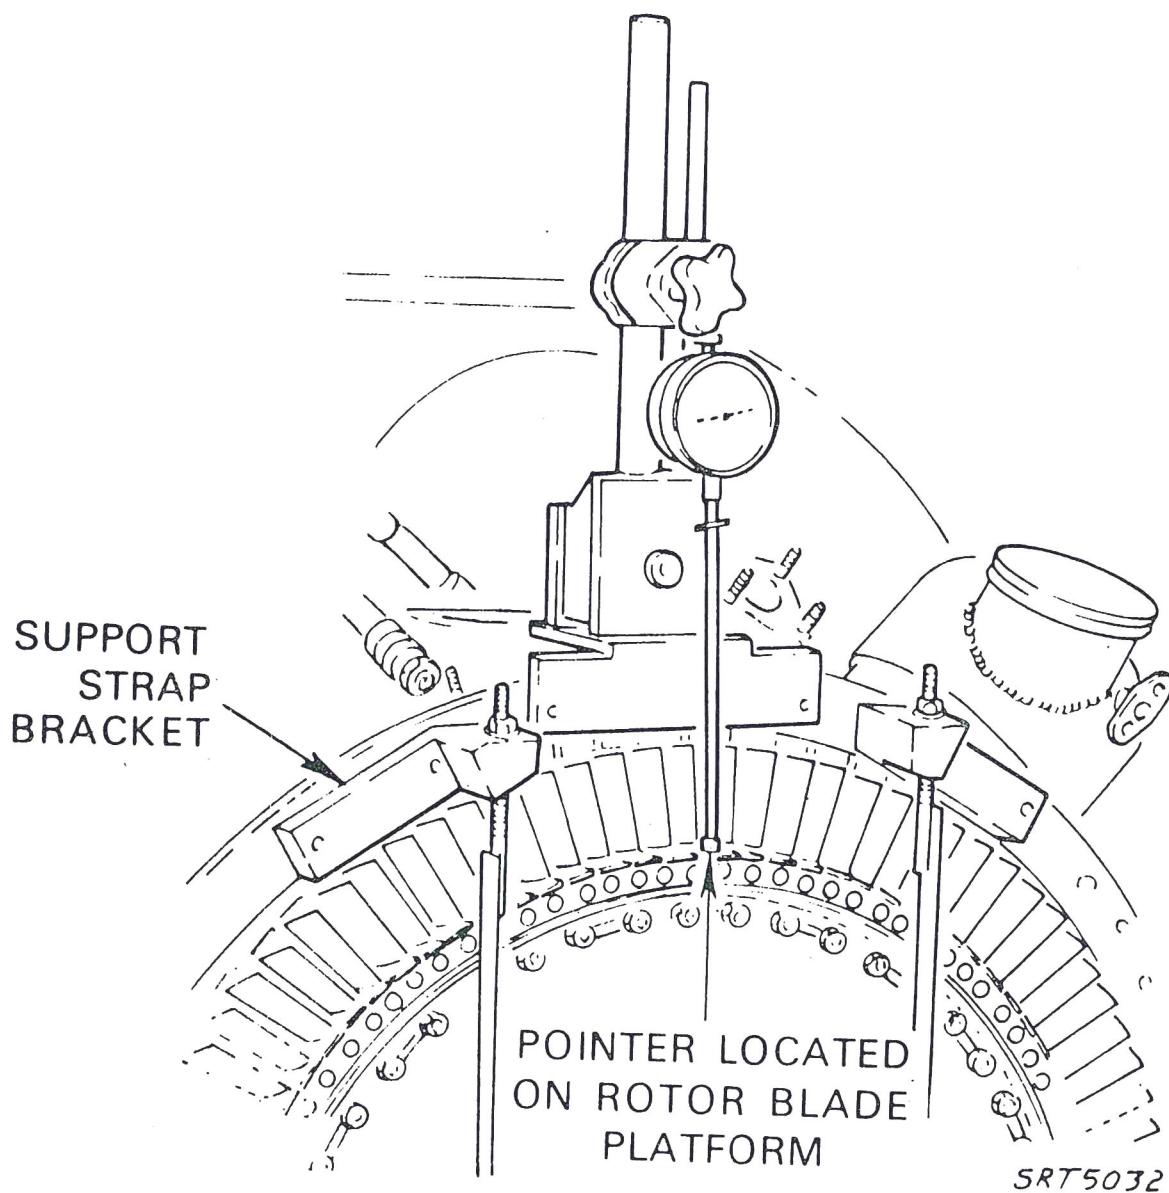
Dial test indicator pointer located on Stage 12 rotor blade platform
